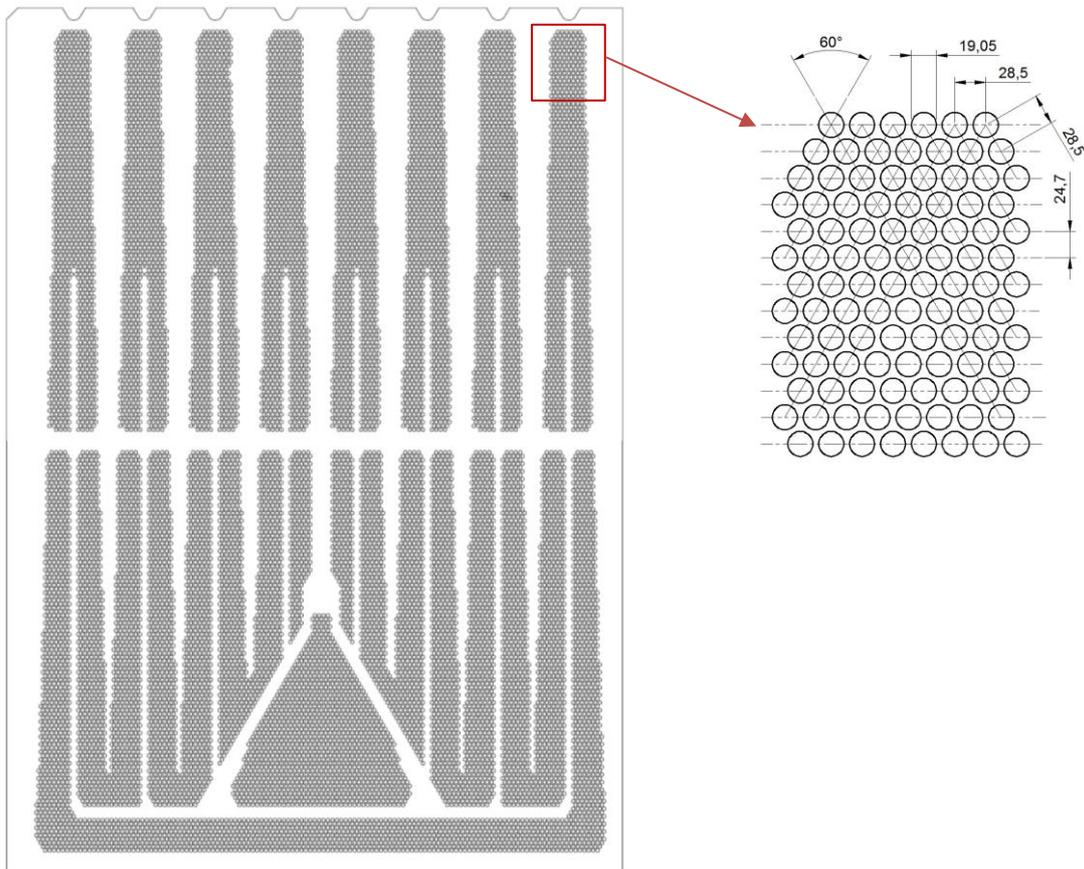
Typical tubes layout on the Condenser tubesheet (dimensions in mm)
